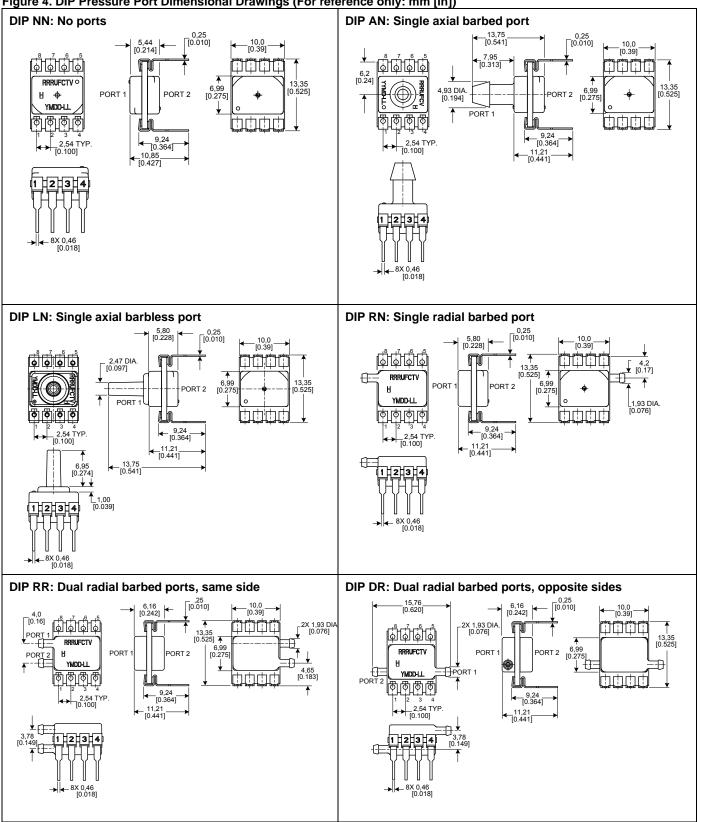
DIP Pressure Port Dimensional Drawings (For reference only: mm [in])
